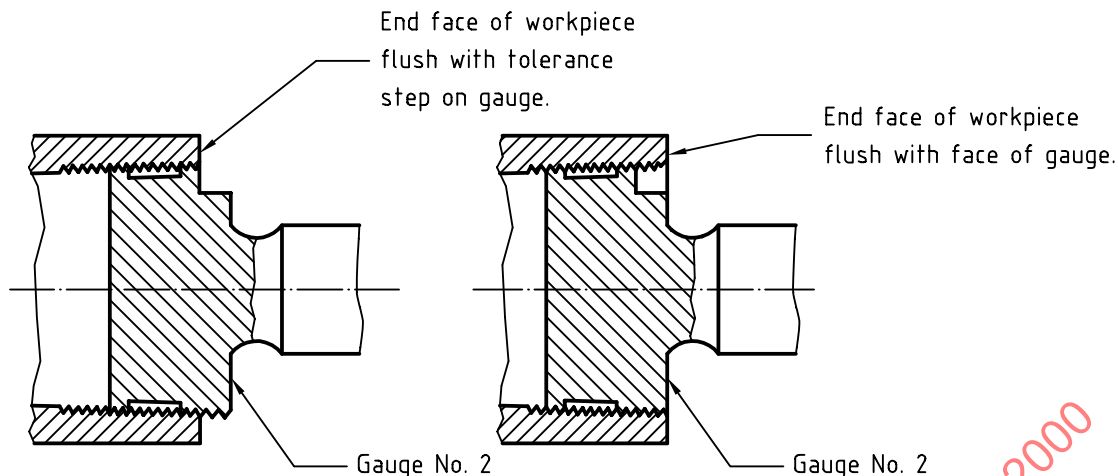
Checking of internal taper (Rc) and parallel (Rp) threads — Stage 2
